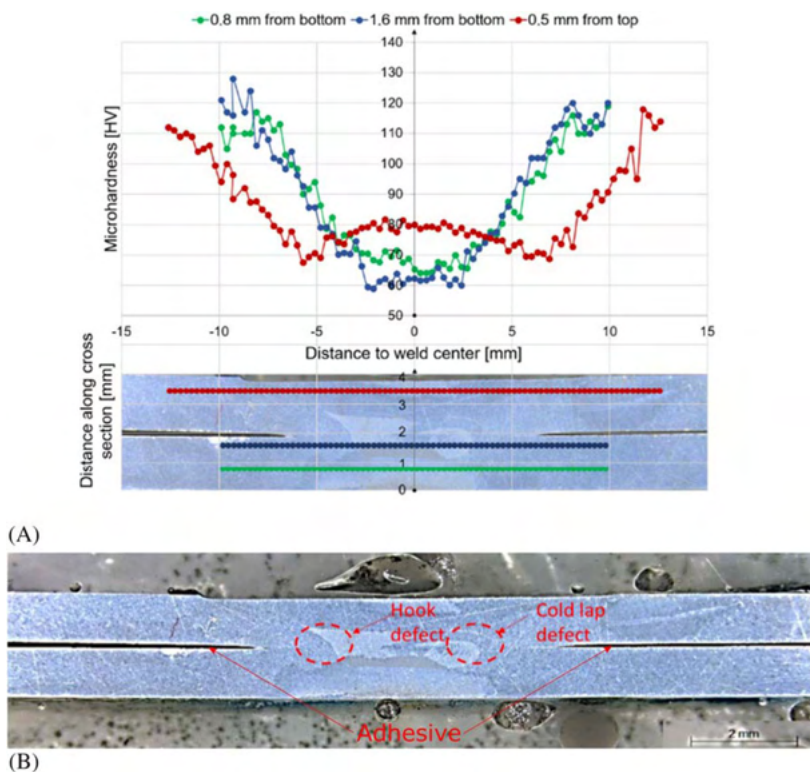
(A) Microhardness profile and (B) joint cross-section of friction stir (FS) weld-bonded joint with 450 kgf [Colour figure can be viewed at wileyonlinelibrary.com]
